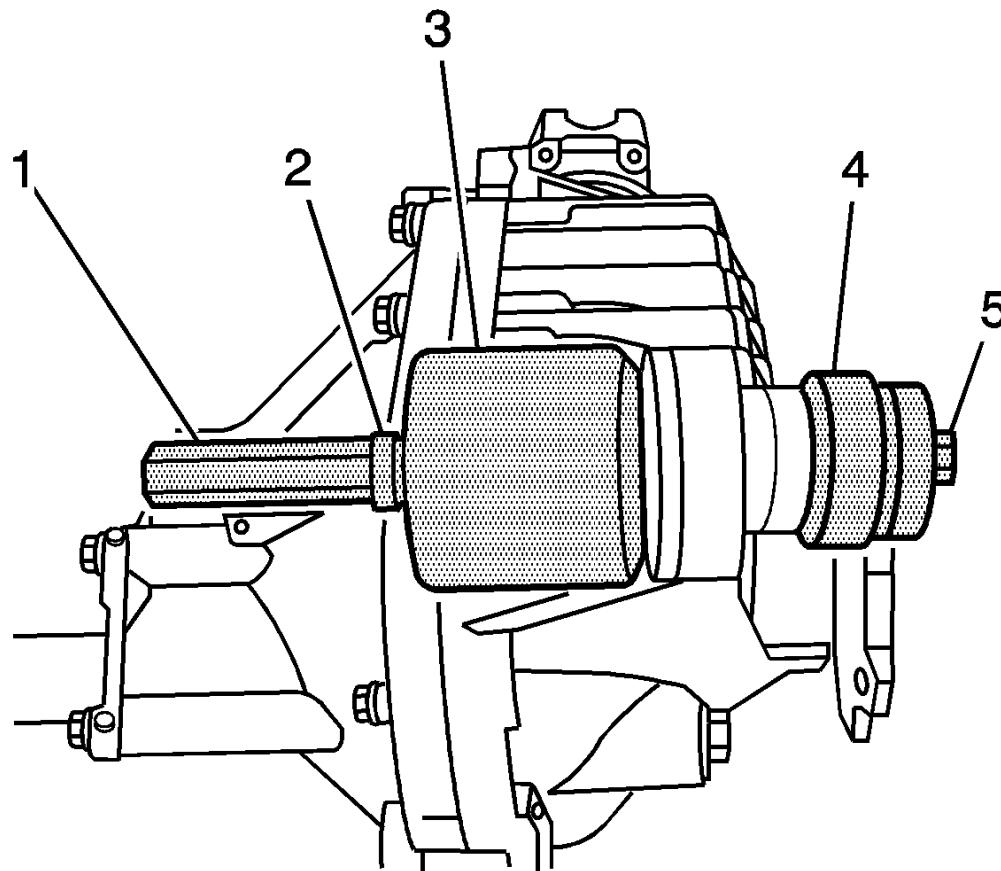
View Of Special Tools J 21474-18, Thrust Bearing, J 36616-2, J 36616-1, & Forcing Screw
